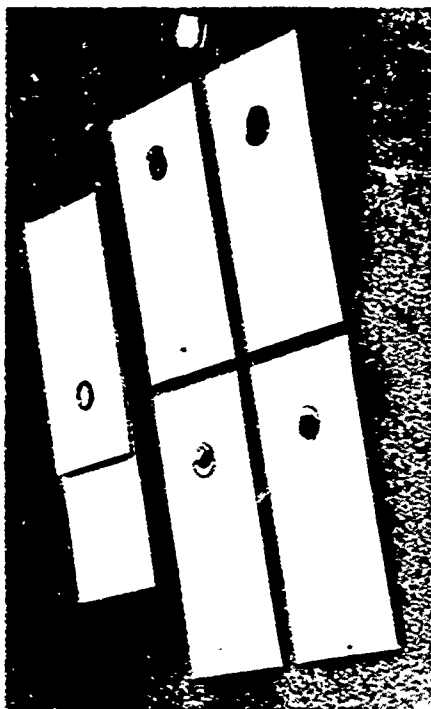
TENSION-SHEAR SPOT-WELDED SPECIMEN BEFORE AND AFTER STRENGTH TESTING (REF. 11)
